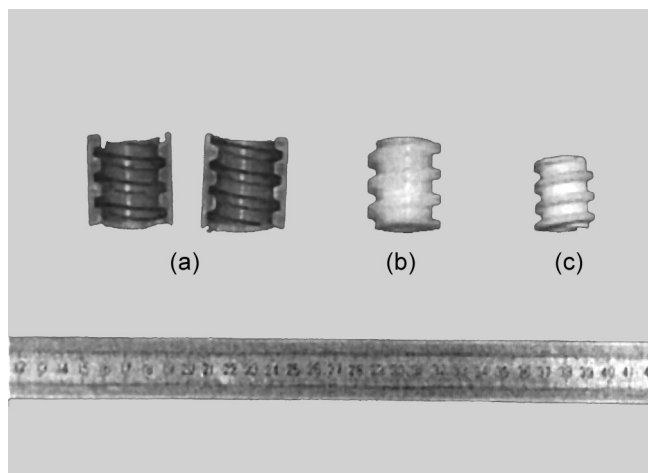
From left to right (a) epoxy resin mould, (b) positive model of the part and (c) sintered part.
